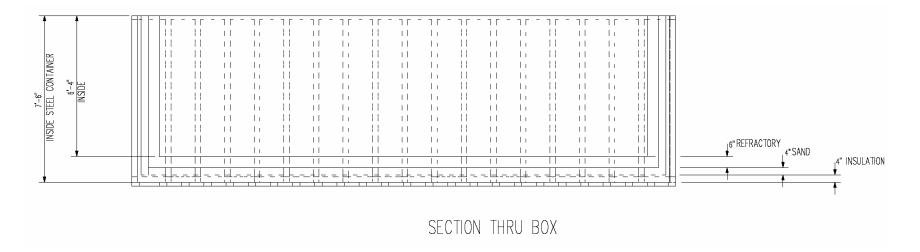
Cross-Section Drawing of ICVTM Box with Internal Components
